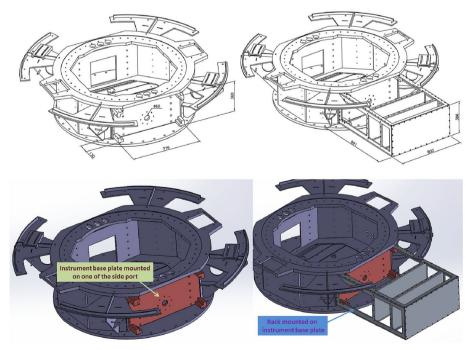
AutoCAD drawing and SOLIDWORKS model of the complete assembly of the TIRCAM2 mounted on the side port of the DOT.
